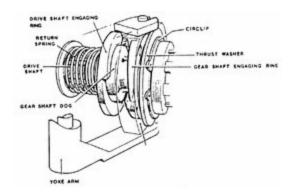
Mk 20 hose-drum unit gearbox selector yoke
